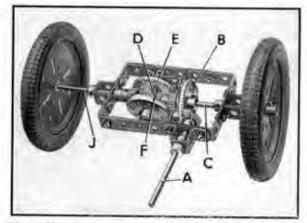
One of the many methods of constructing differential gear in Meccano.
